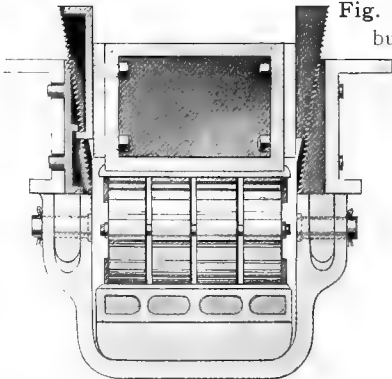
Automatic Adjustable Chafing Plate for Passenger Trucks. Commonwealth Steel Company.
